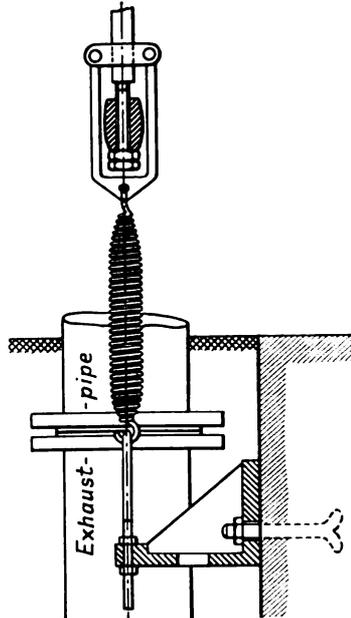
Tension Spring on Exhaust Valve.
